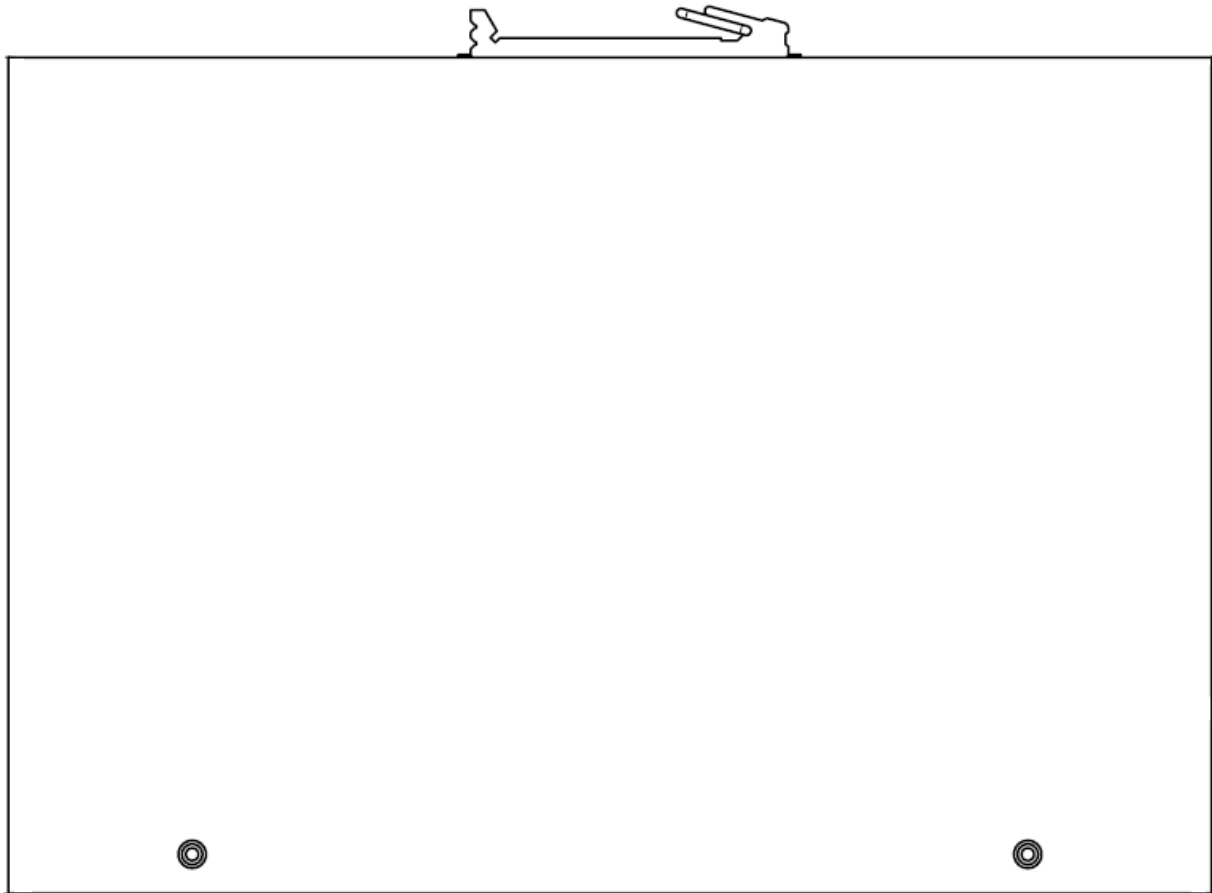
Top view FG-PAM-RGN-Eth-RL,V51 devices
